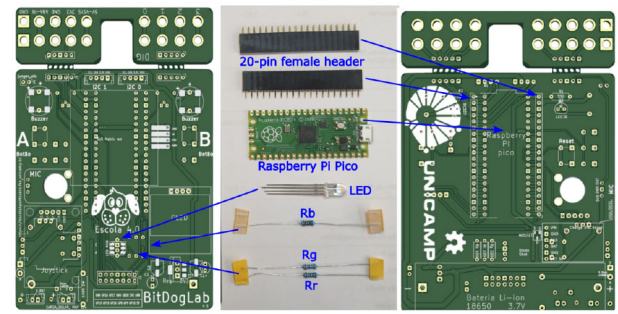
Front and back view of the PCB showing the basic components to be soldered in the positions indicated on the board to carry out one of the STEAM activities.
